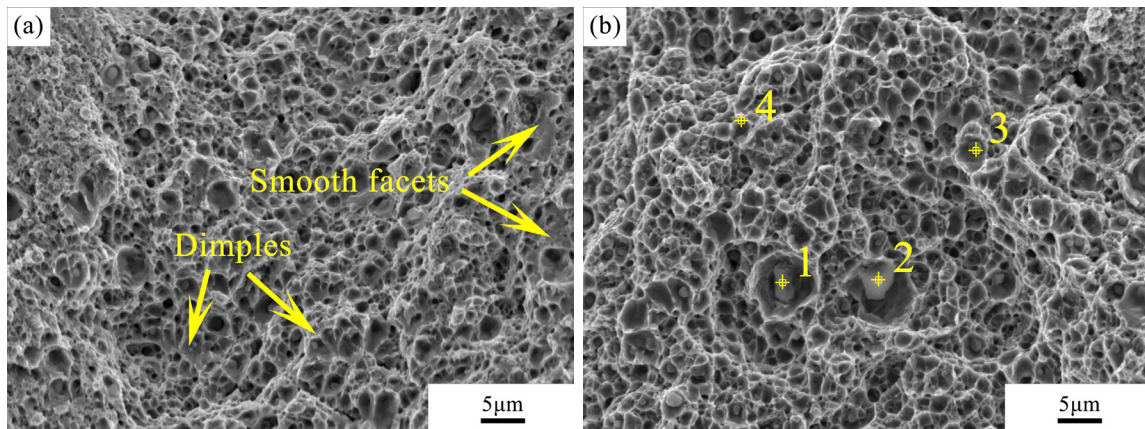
SEM micrographs of the fractures for specimens after tensile testing: (a) as-joined specimen and (b) heat-treated joint.
